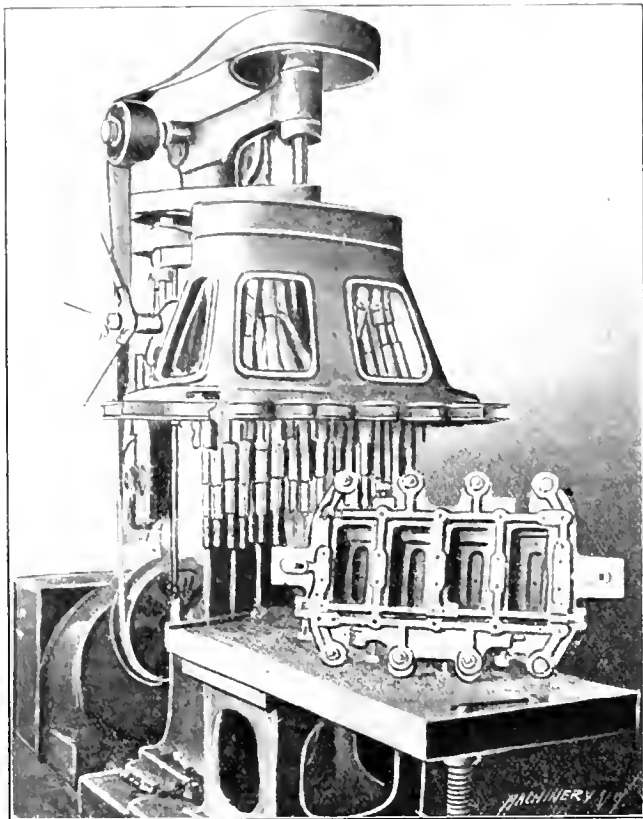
Twenty-four-spindle Machine for Drilling the Frames
